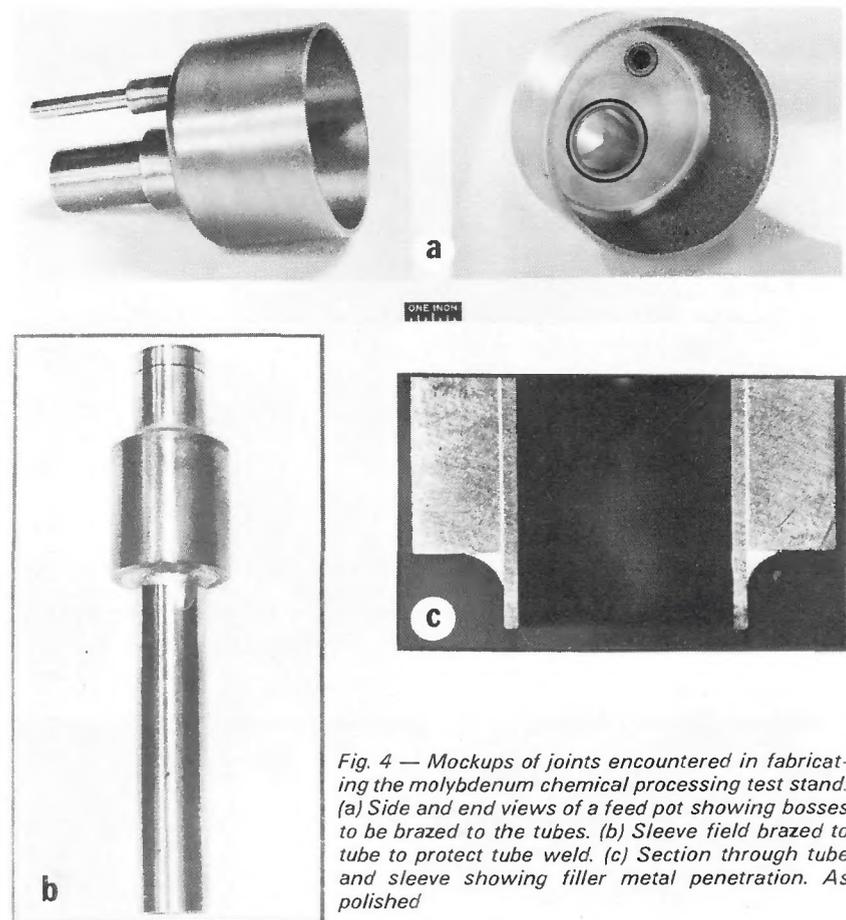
Mockups of joints encountered in fabricating the molybdenum chemical processing test stand. (a) Side and end views of a feed pot showing bosses to be brazed to the tubes. (b) Sleeve field brazed to tube to protect tube weld. (c) Section through tube and sleeve showing filler metal penetration. As polished
